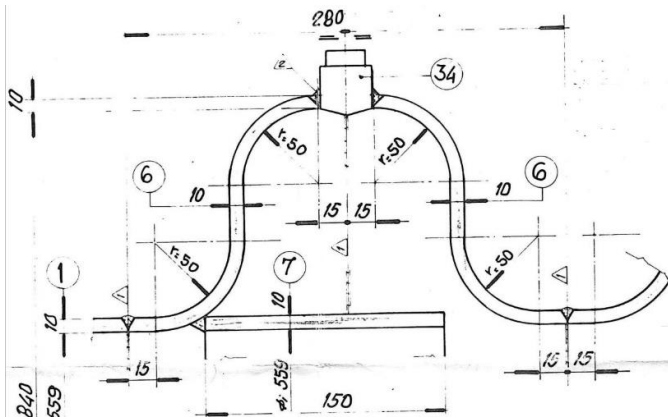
Dimensions of ASTM A285 grade C steel expansion joint.
